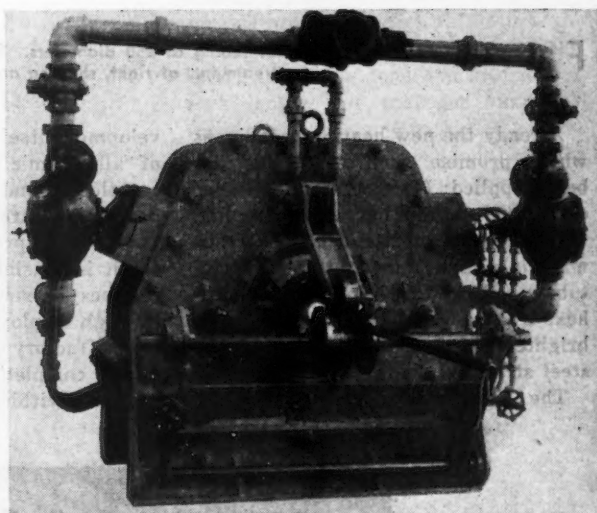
B—Doughnut spray for continuous quenching welded steel tubing of diameters up to an inch or so.
